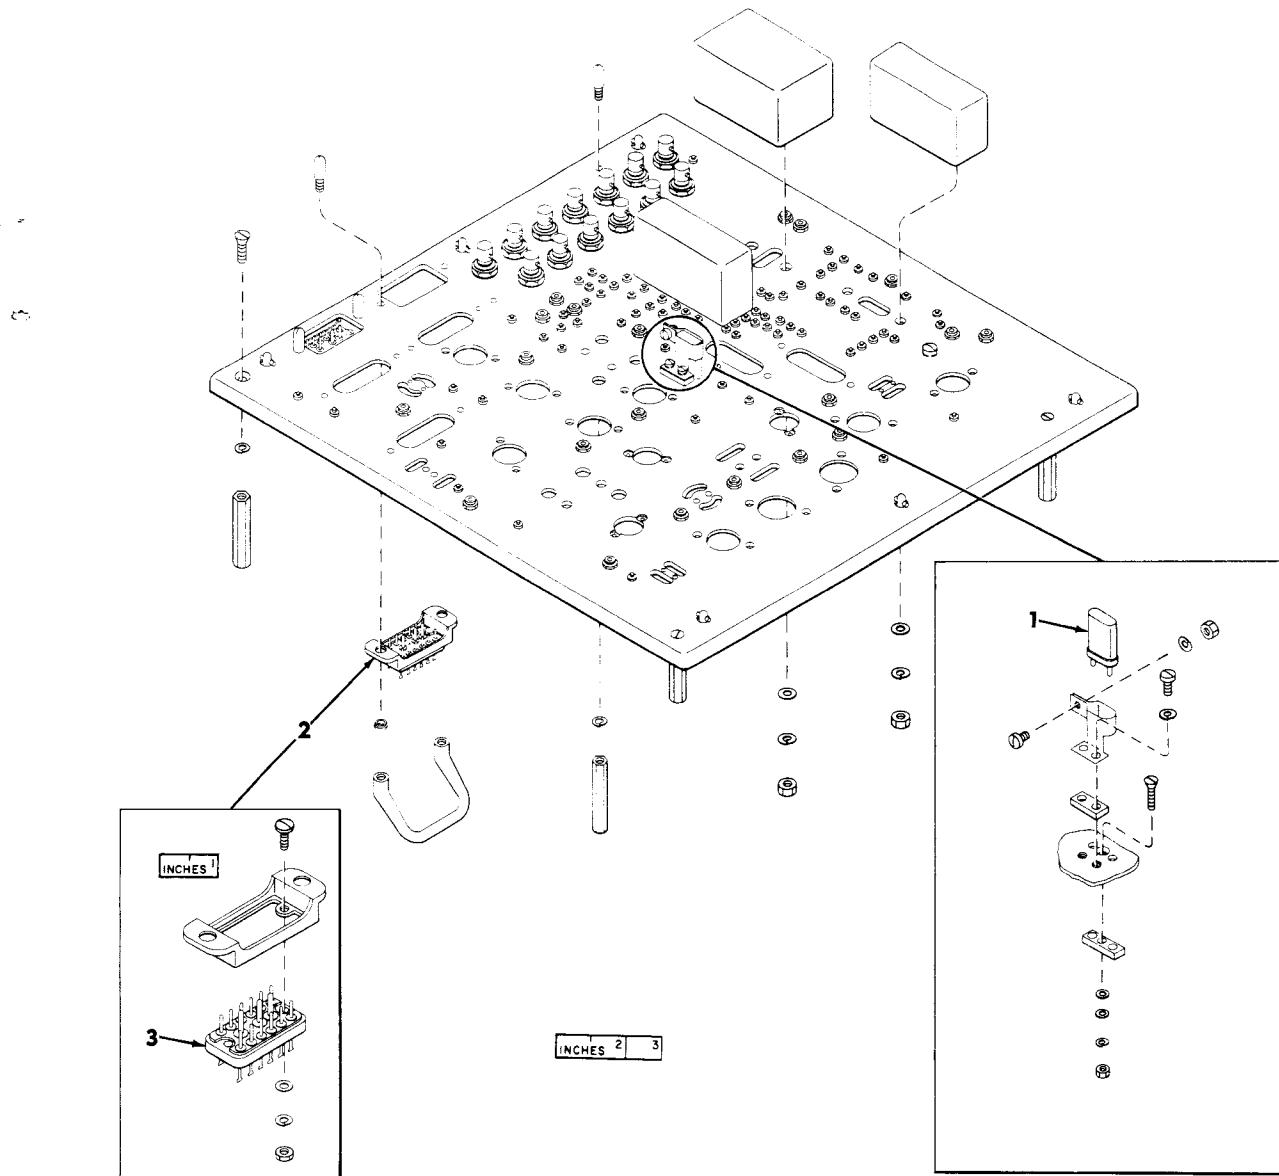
Synchronizer, electrical (9983715) – partial exploded view
